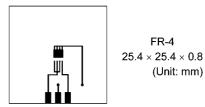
Device Mounted on a Glass-Epoxy Board (b)
